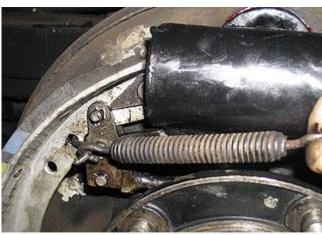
Showing how the retaining spring is fitted onto the "W" link. Use pliers or side cutters to position the spring end into the hydraulic cylinder anchorage
